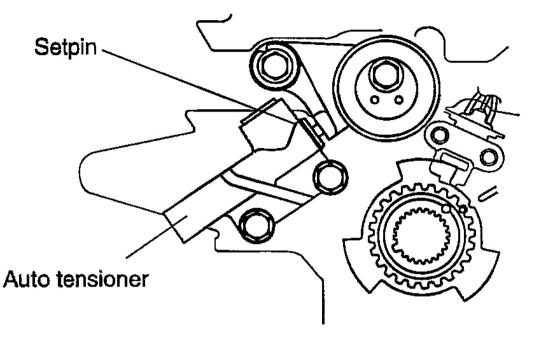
Installing The Auto Tensioner To The Oil Pump Case Courtesy of KIA MOTORS AMERICA, INC.
